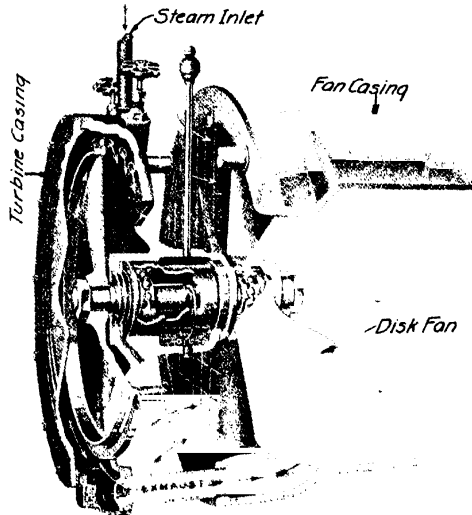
Coppus Turbine-driven Blower for producing Forced Draft.
